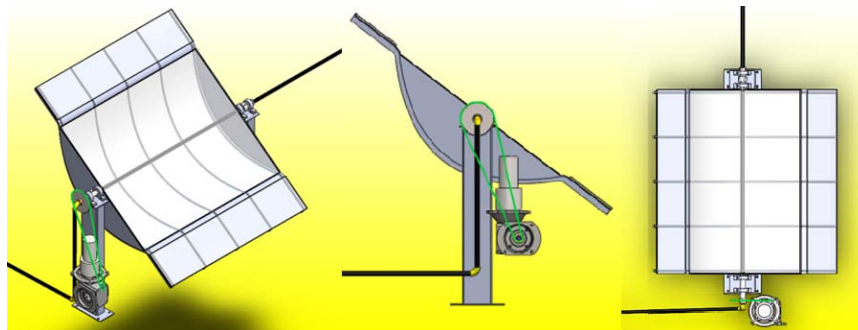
Complete collector assembly- isometric, side and top view (left to right)
